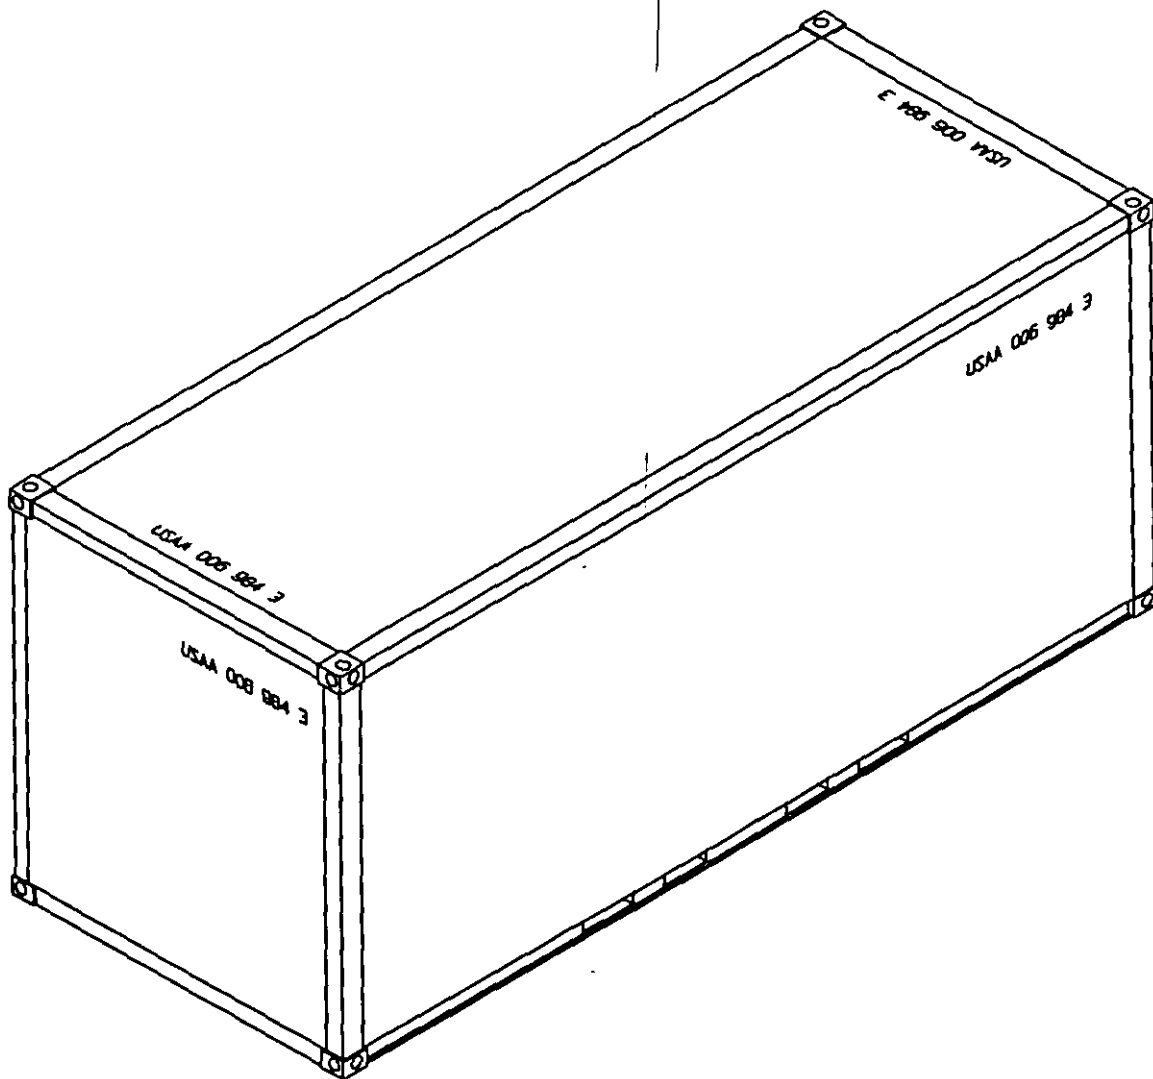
B - TYPICAL HORIZONTAL LAYOUT OF
